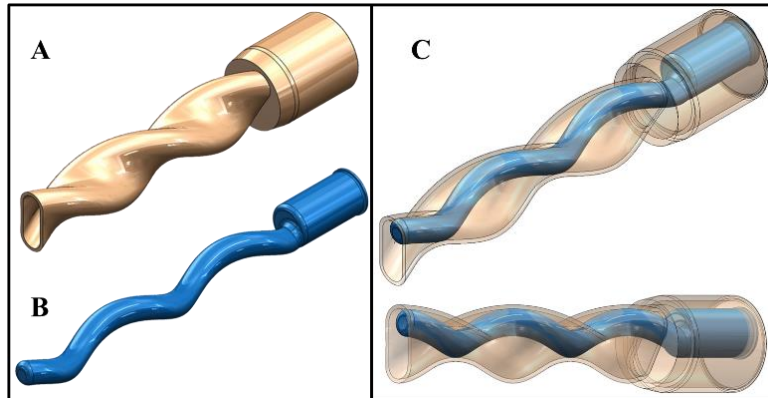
(A) Stator, (B) Rotor, and (C) Assembly of PCP.
